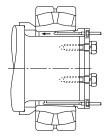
Mounting with Special Sleeve and Hydraulic Pressure
